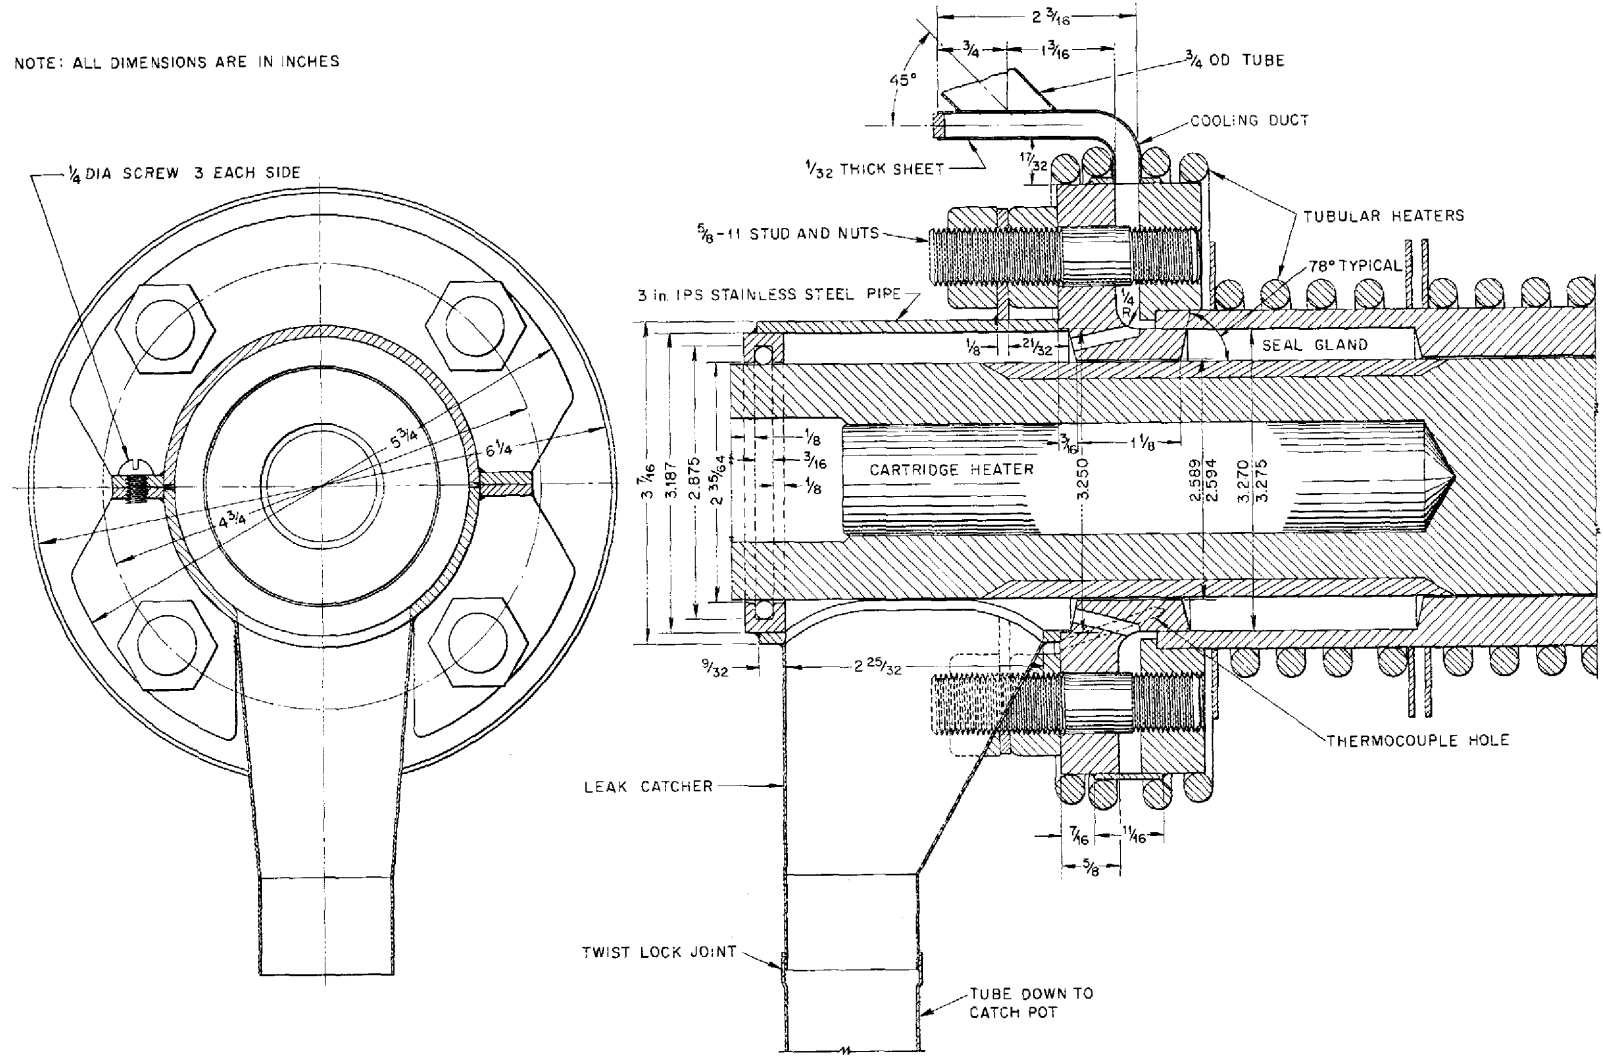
Seal Gland for ARE Pump with Packed Frozen Seal.
